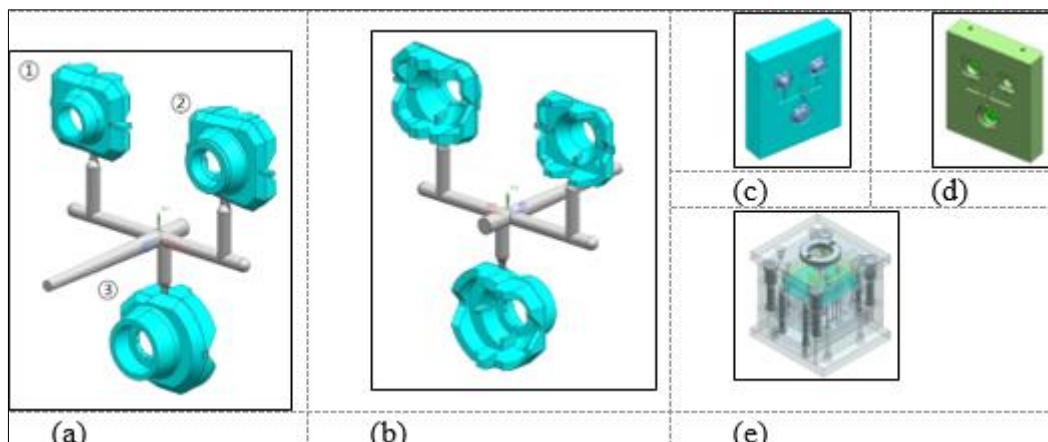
3D model: a) front side b) back side c) moving core plate d) fixed core plate e) full of mold
